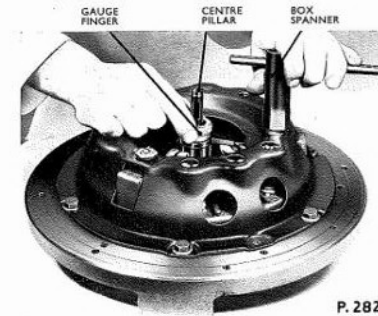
Adjusting the release lever height using the Churchill Tool 99A
